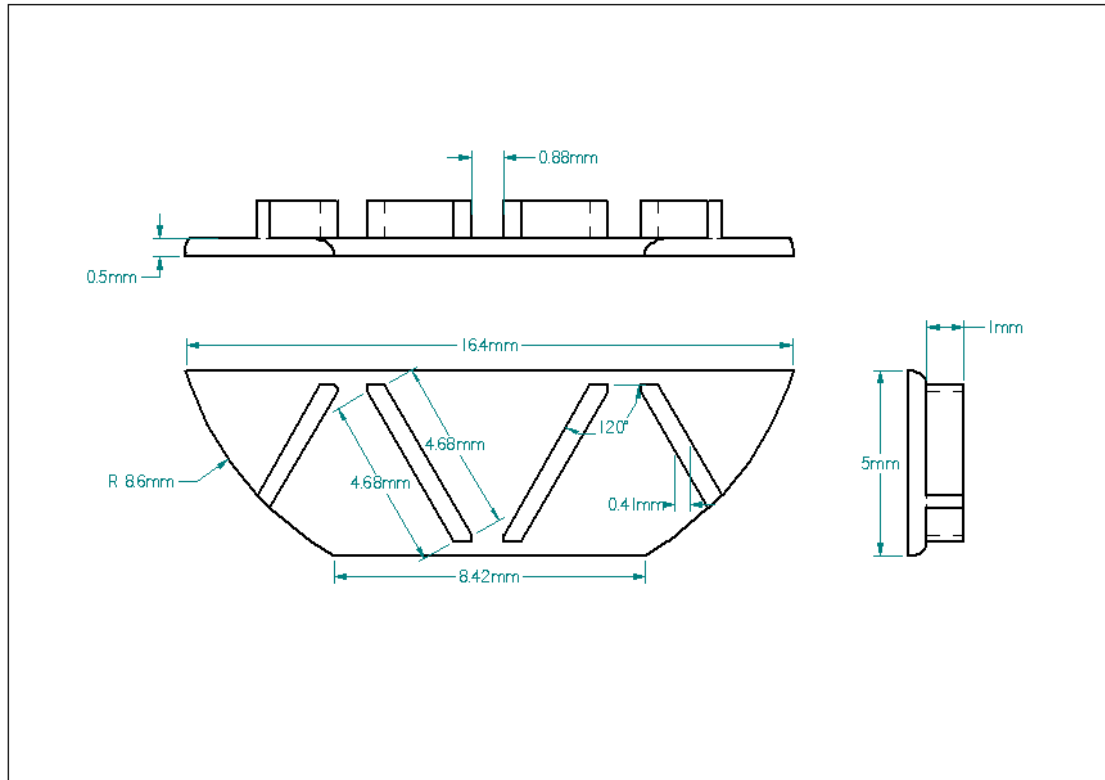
CAD drawing of the R20S vortex generator design
